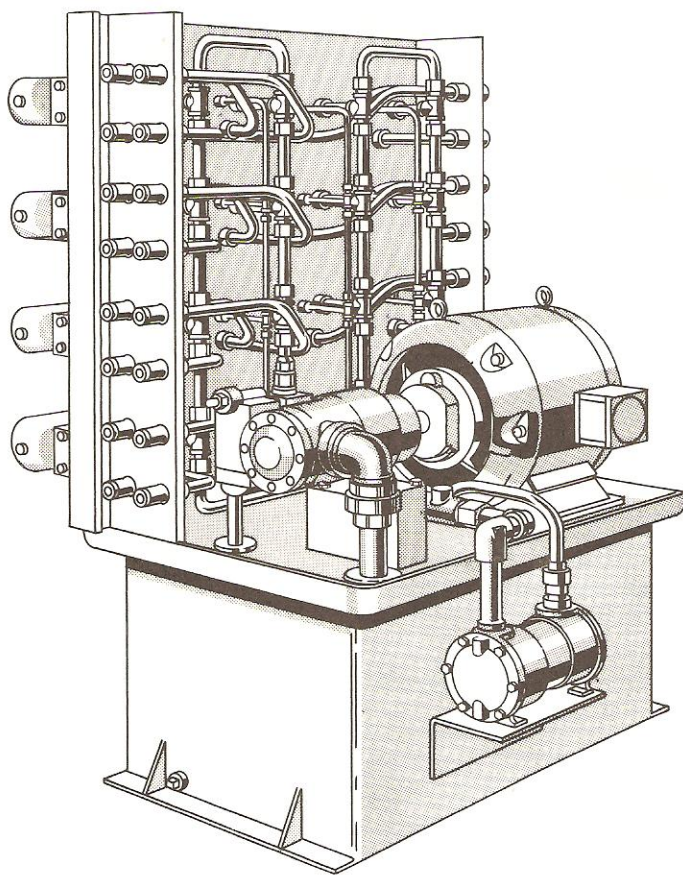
Back-Mounting Leaves Pipe Connections Undisturbed
